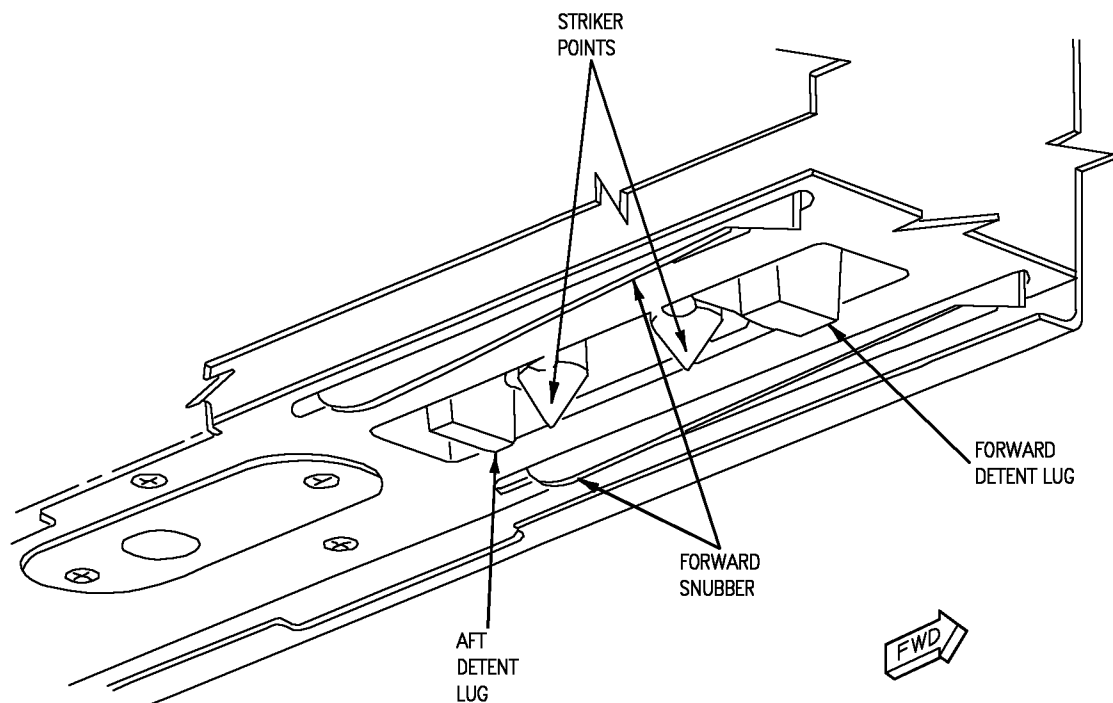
LAU-7 Launcher Inspection (Sheet 1 of 2)
